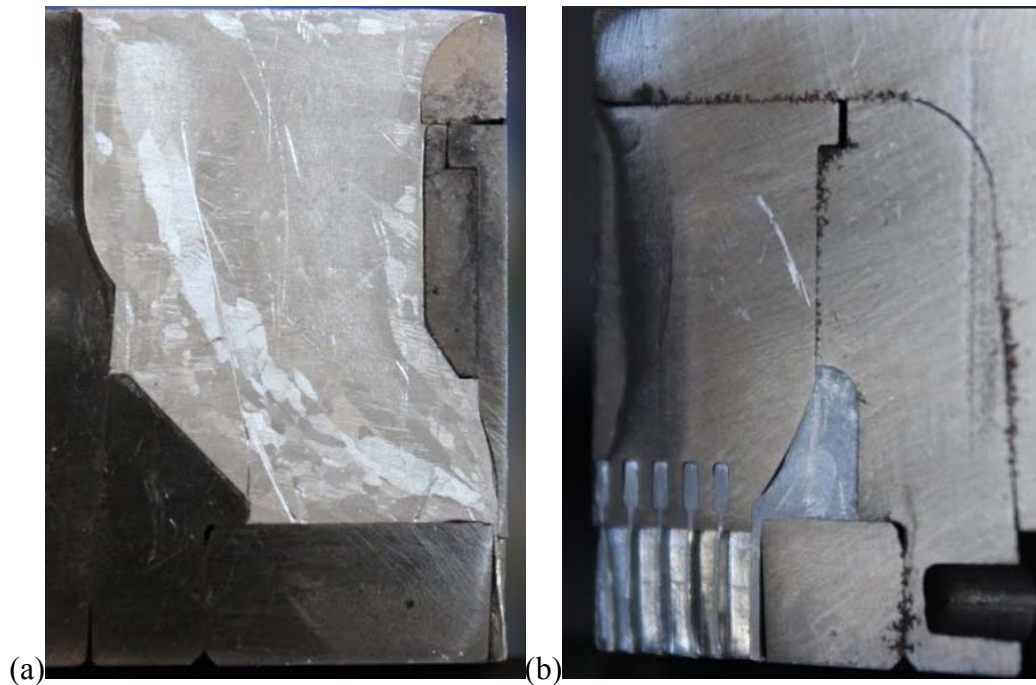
Etched surface of aluminum filled modular die; (a) side view cross section and (b) front view cross section
